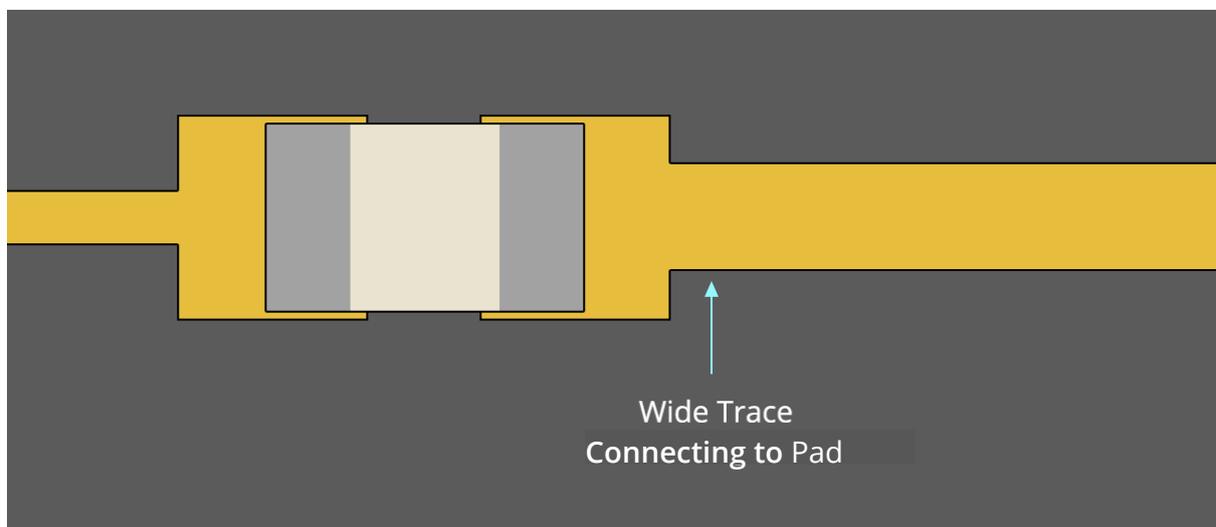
Connecting Large Traces to Component Lands (Good Design)
